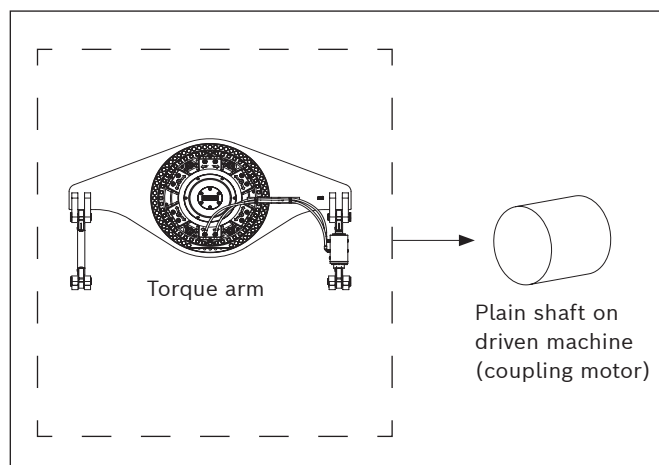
Double ended torque arm mounting at plain shaft (Only for CBm 2000 and CBm 3000 coupling version)
